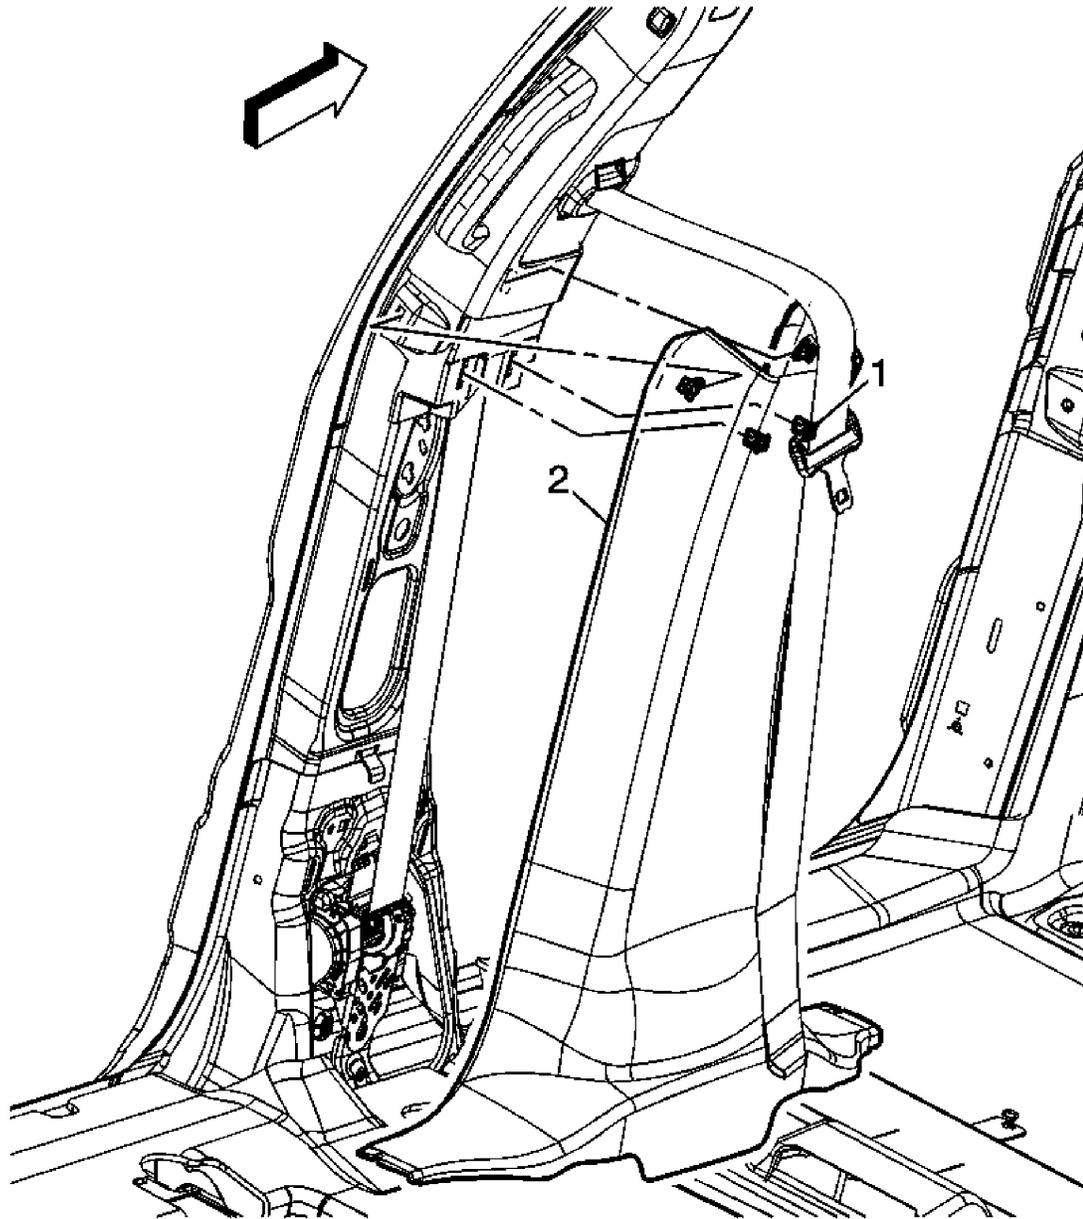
Identifying Center Pillar Lower Garnish Molding
